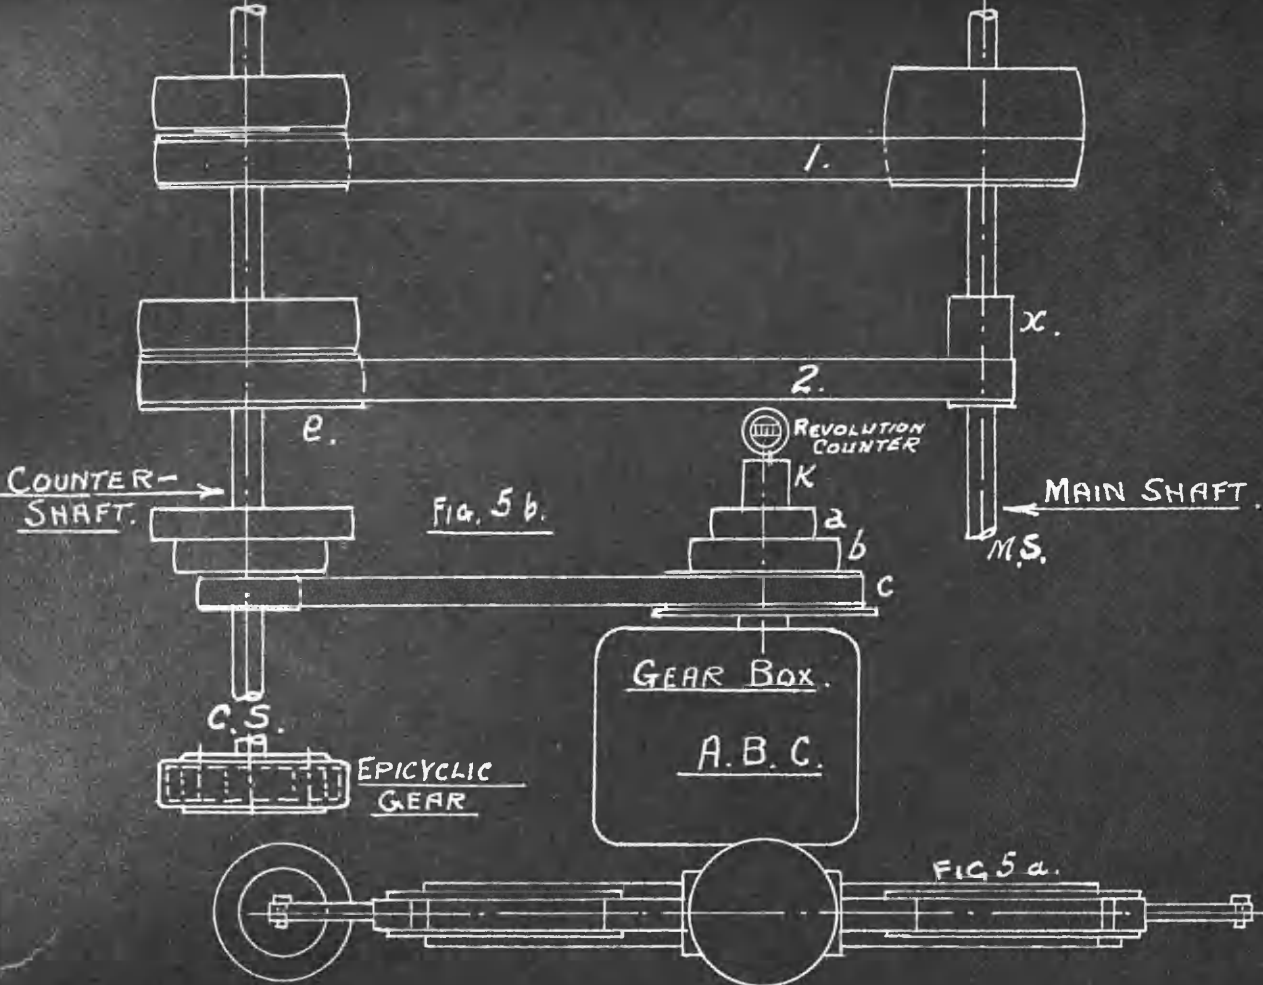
PLAN VIEW OF BELT DRIVES AND GEARS
